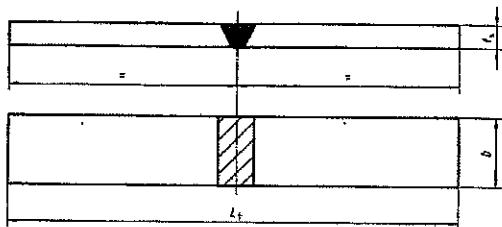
Transverse root and face bend test specimen for a butt weld (RBB and FBB)
